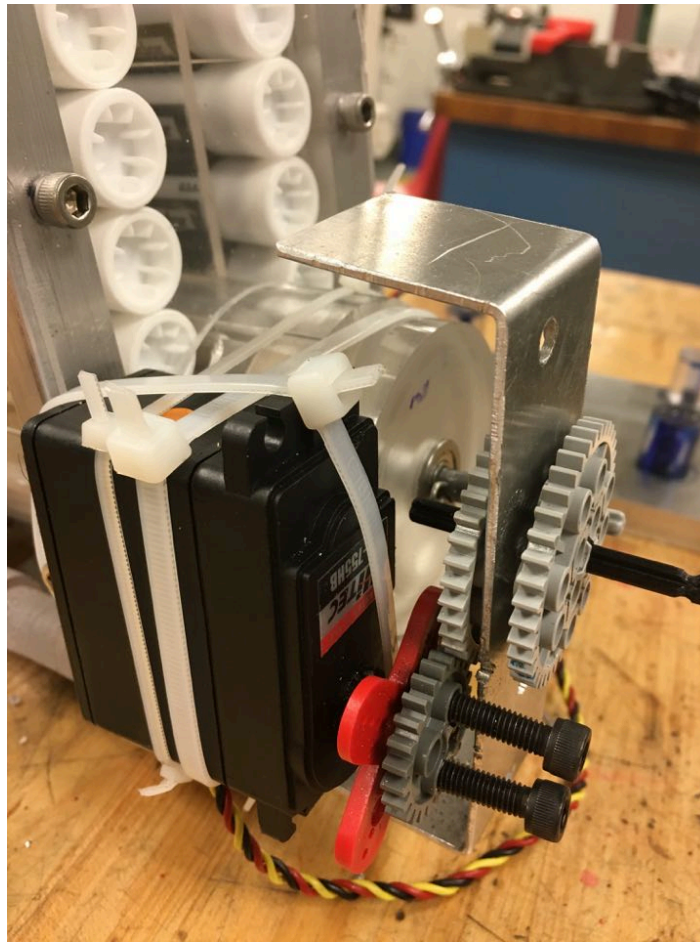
Back view of the servo motor, axle, and gear combinations used to drive the batman piece
